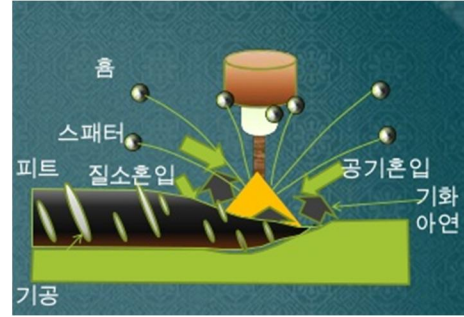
Welding defects in gas metal arc welding (GMAW) of Zn-coated steel sheets
